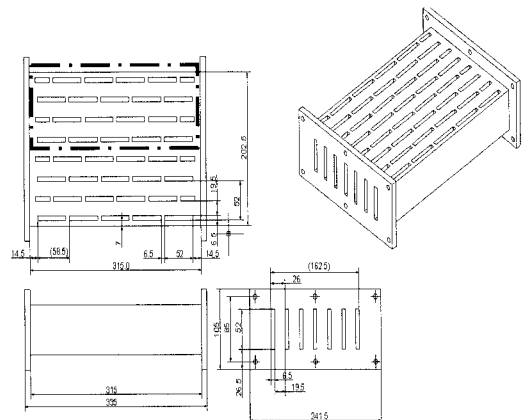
Drawing of the ceramic exchanger core with its dimension.
